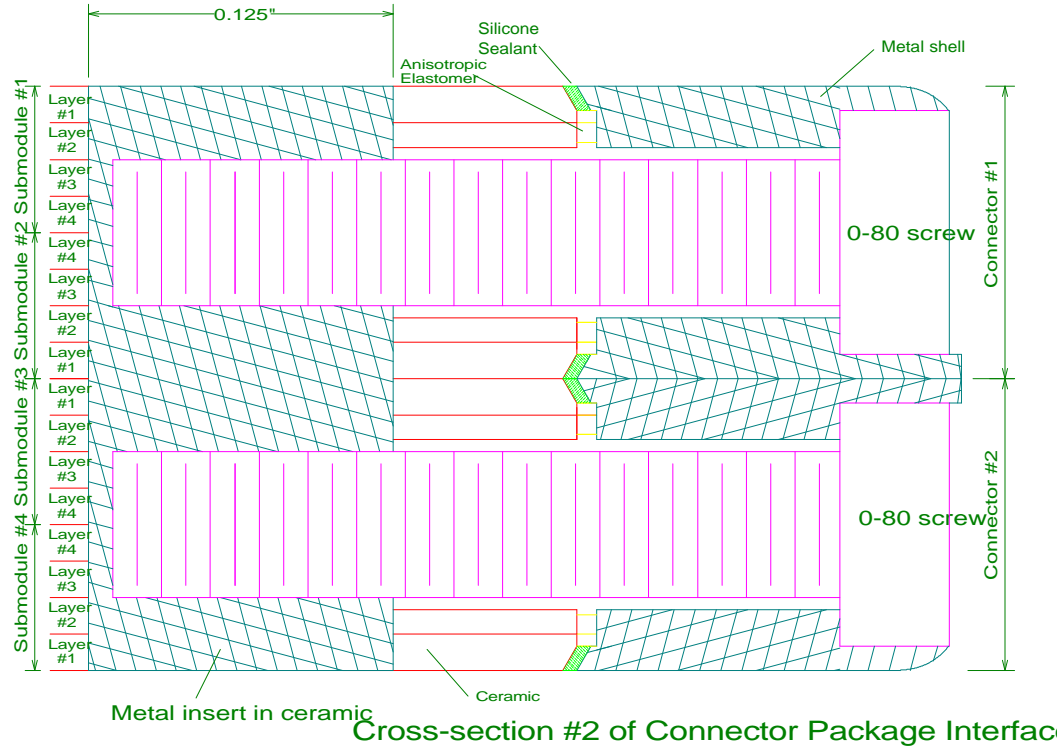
Cross-section of the ceramic package at the location of the connector screws.
